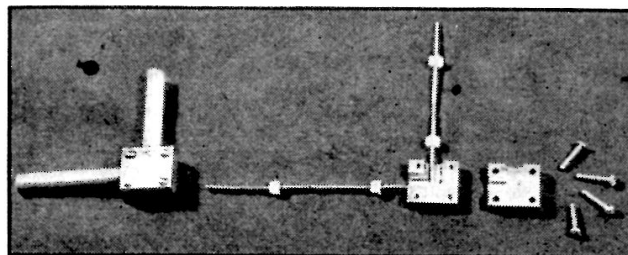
Right-angle joint for coaxial lines and its components.
